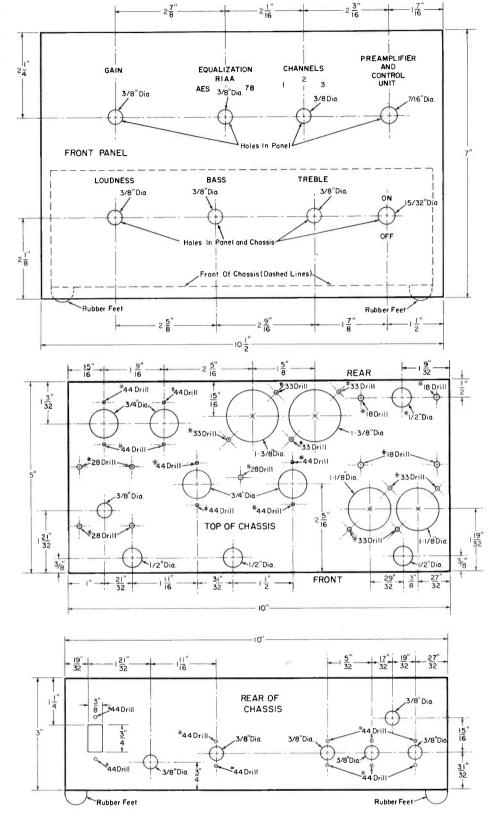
Drawings Showing Locations of Holes in Chassis and Front Panel.
